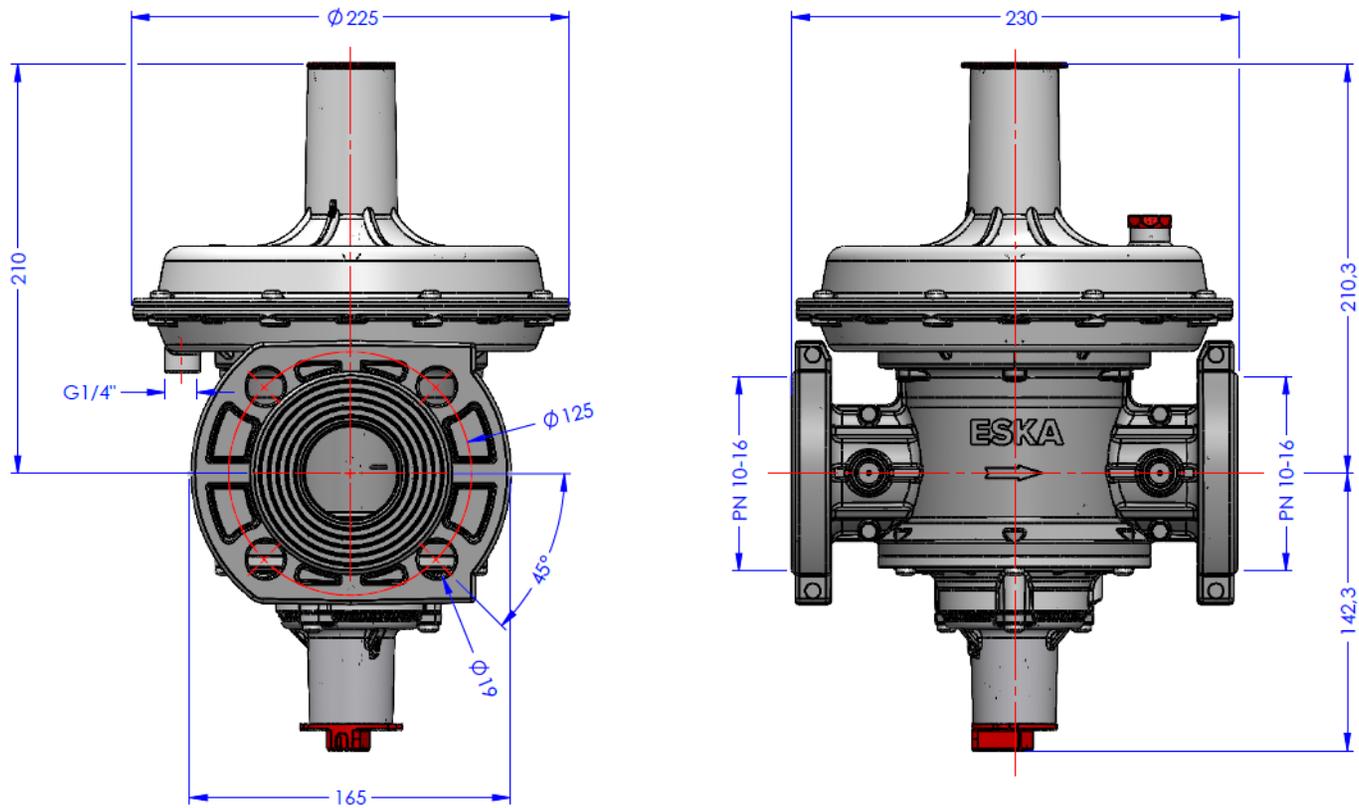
ERG-EH DN50 Flanged Technical Dimensions
